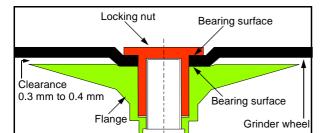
Correct Mounting of Wheel (in excess of 178 mm dia)
